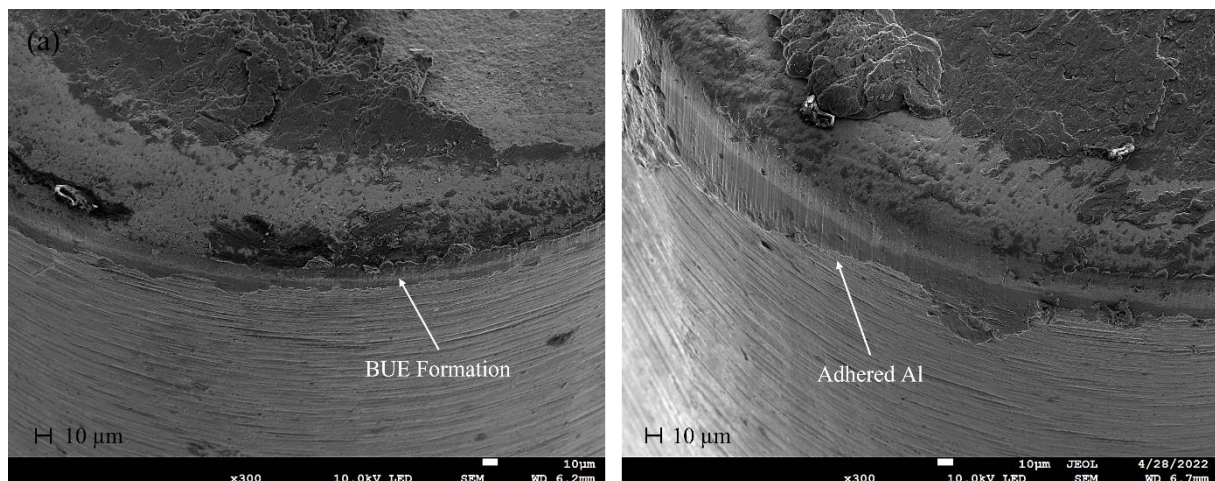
Aluminum adherence at flank surface of WC-Co cemented carbide tools at cutting speed 1200 m/min. (a) BUE formation after 5s of continuous machining. (b) Material accumulation of adhered aluminum after 60 s of continuous machining [26].
